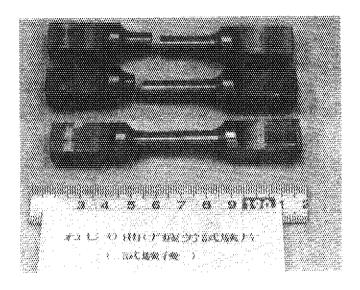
Appearance of specimen after torsion fatigue test(base material).
